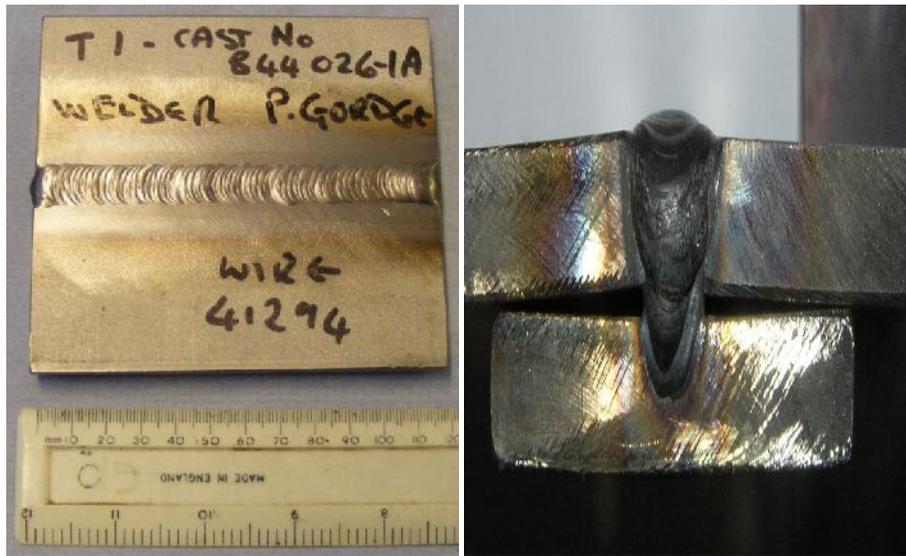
Top and side view of welded plates, simulating tube butt welds.
